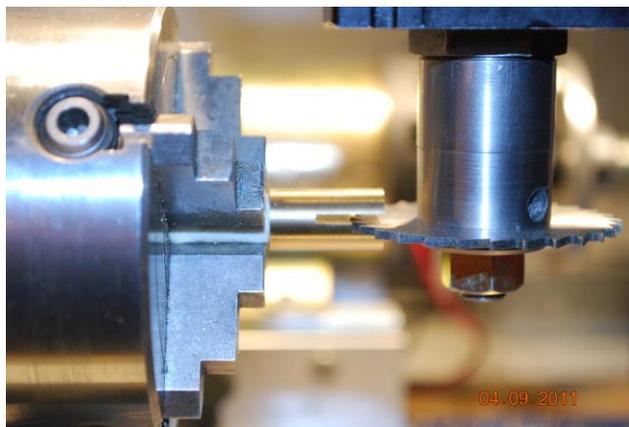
Cutting the slot in the key stem. Note the smaller end is wrapped with masking tape to prevent the lathe chuck from marking the surface.
